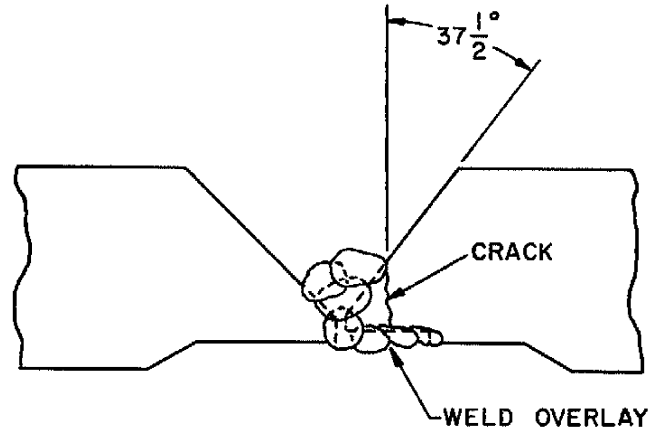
Sketch illustrating crack path through HK-30 base metal and stopping at weld overlay.
